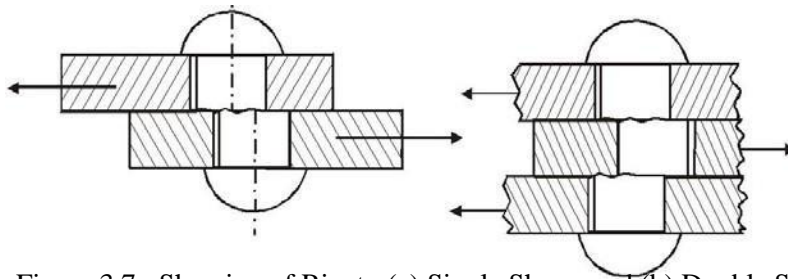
Shearing of Rivet : (a) Single Shear; and (b) Double Shear
